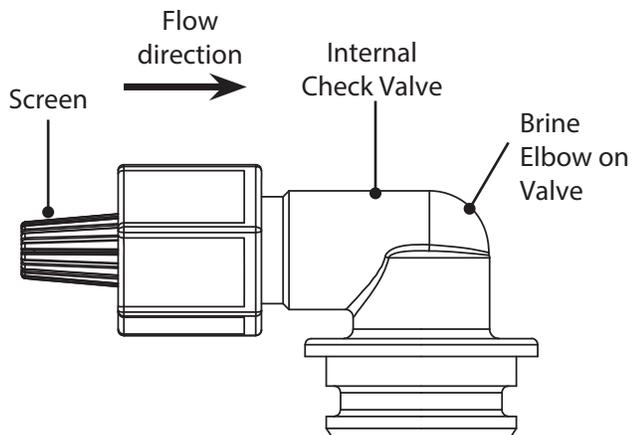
Air Draw Check Valve Assembly(CH4642-WR-A)
